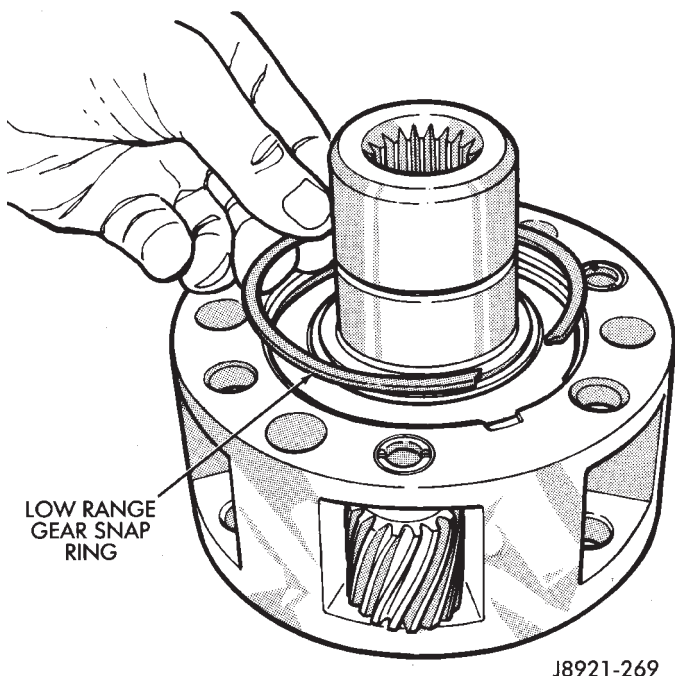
Low Range Gear Snap Ring Removal/Installation
